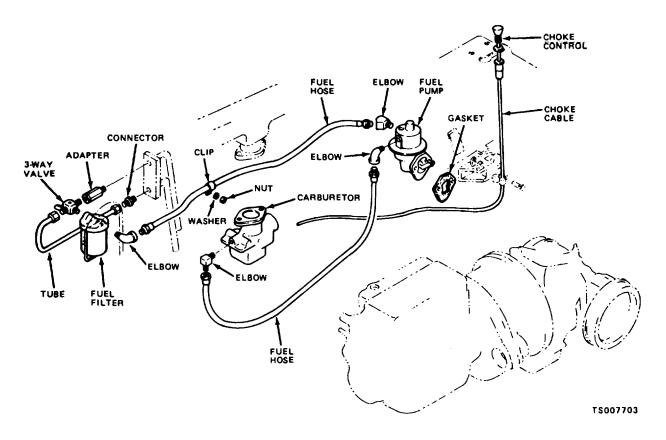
Fuel Filter, Fuel Pump, Lines and Fittings, Removal and Installation
